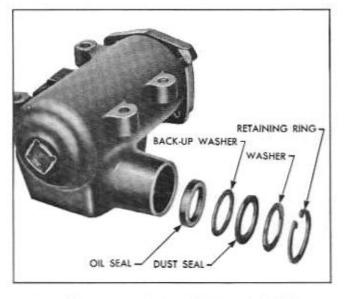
Pitman Shaft Oil Seal-Exploded View
